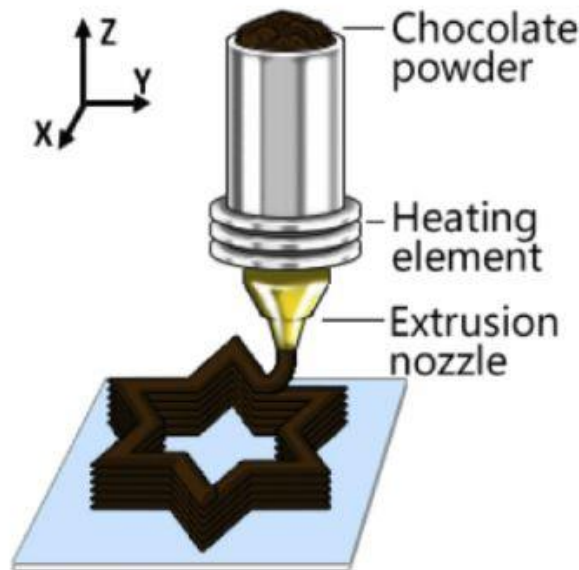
Schematic diagram of hot melt extrusion 3D printing [35].
